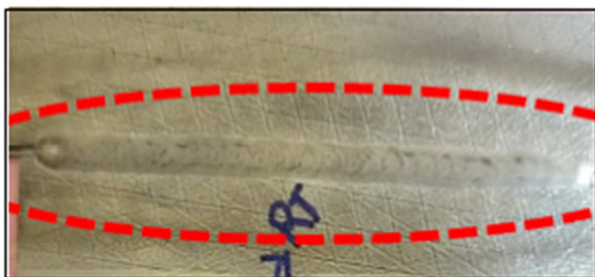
Welding of AM300-P plates using W2 filler.
